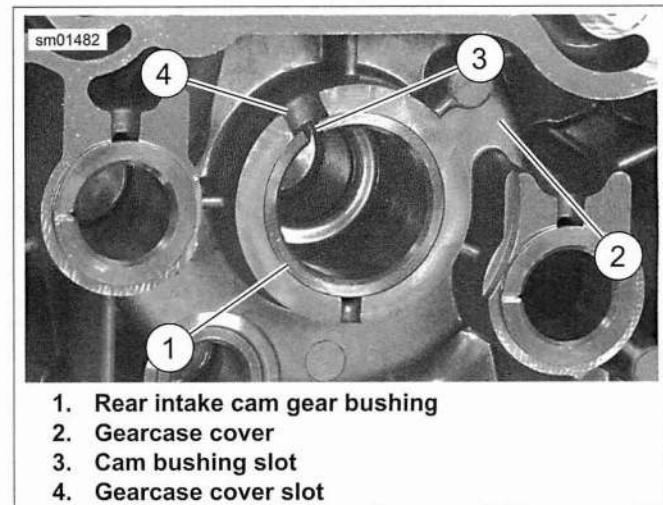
Rear Intake Cam Gear Bushing Installed in Gearcase Cover
